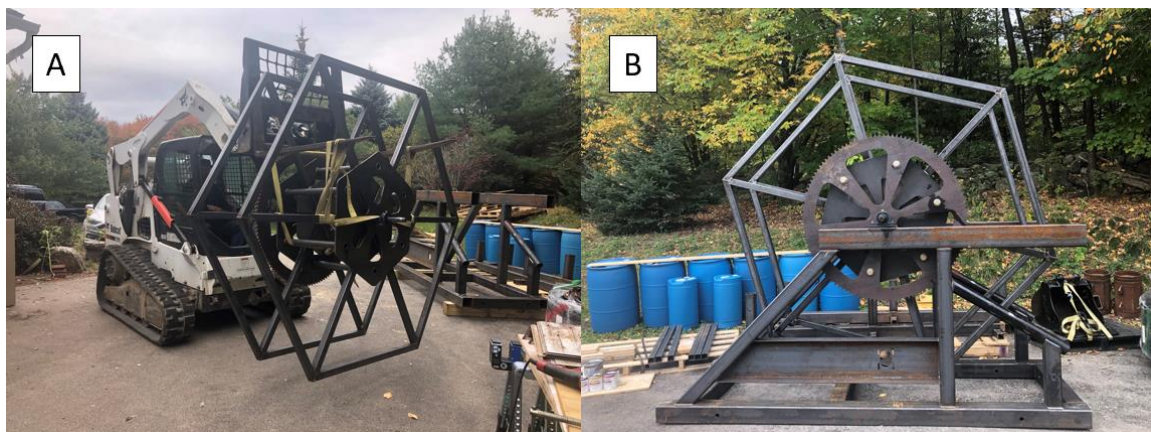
(A) hose reel wagon wheel speared by Prof. Slocum’s skid steer, (B) The hose reel assembled.
